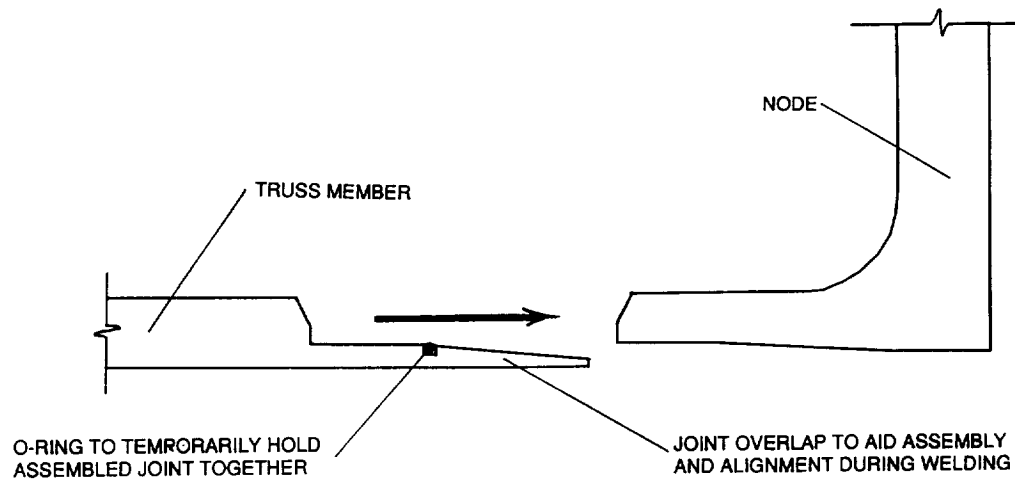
Joint overlap to aid assembly and alignment during welding.
